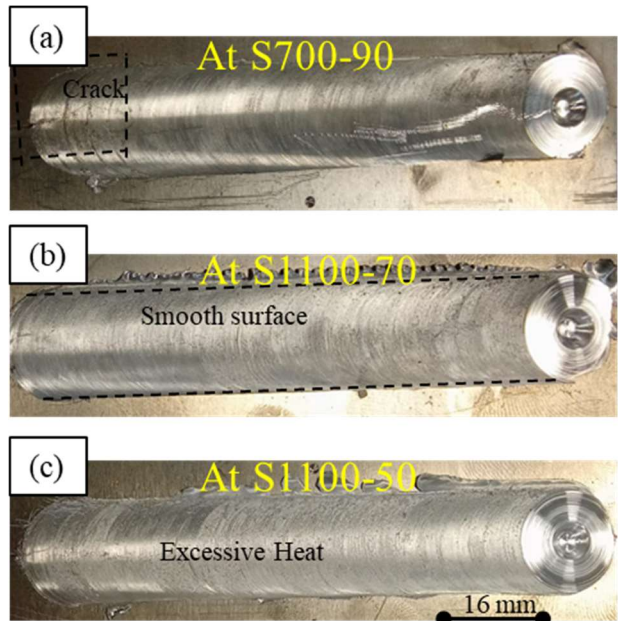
Surface appearance of the friction stir weld sample without powder at three passes (a) S700-90 (b) S1100-70 (c) S1100-50.
